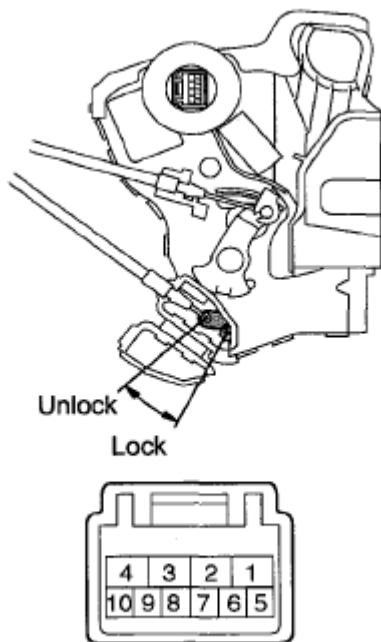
Identifying Rear Door Lock Motor LH Circuit Wiring Diagram
